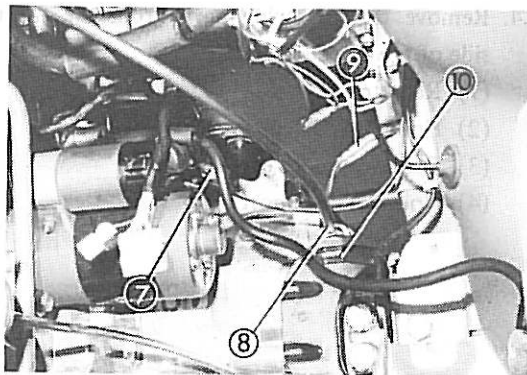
Removing Parts from Engine Compartment (Part 3)
